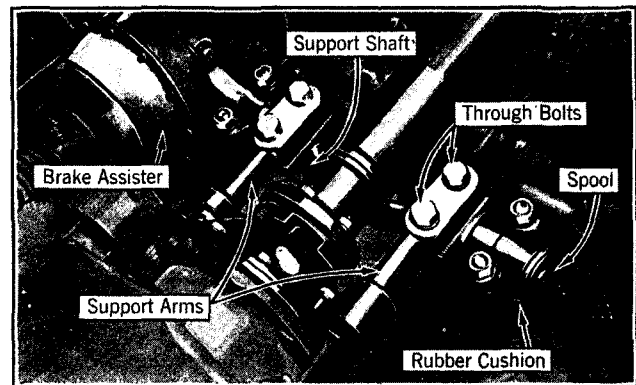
The rear support is mounted in rubber on the center frame cross member.
